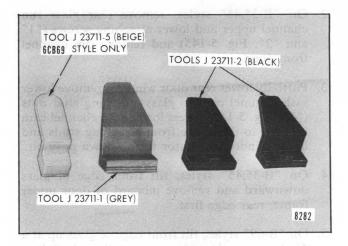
Glass Alignment Gauge Blocks, Tool J-23711 or Equivalent
